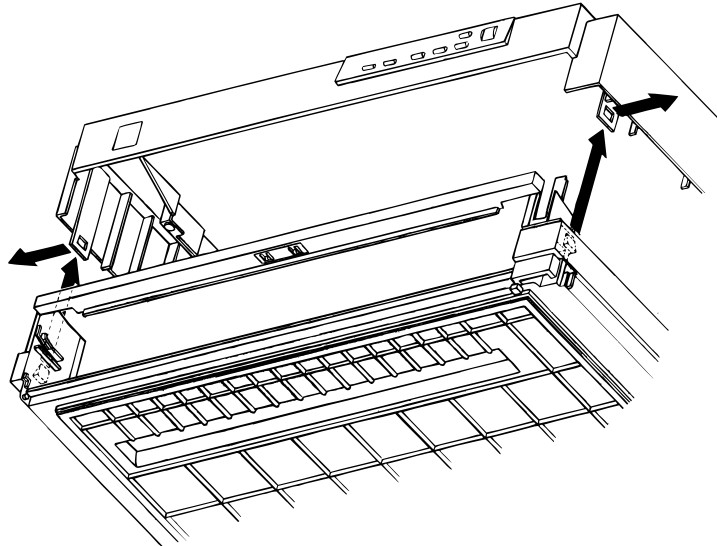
Releasing the Upper Housing Assembly Hooks
